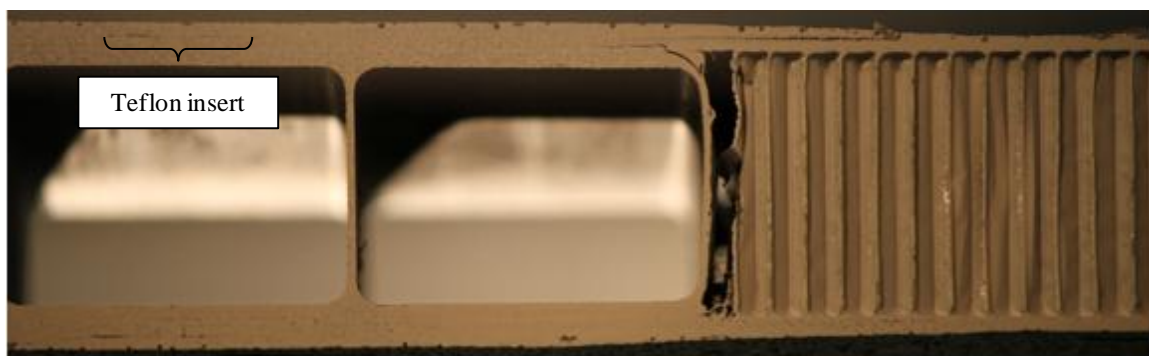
Digital photograph of cross-section of a DRJ specimen, just prior to failure.
